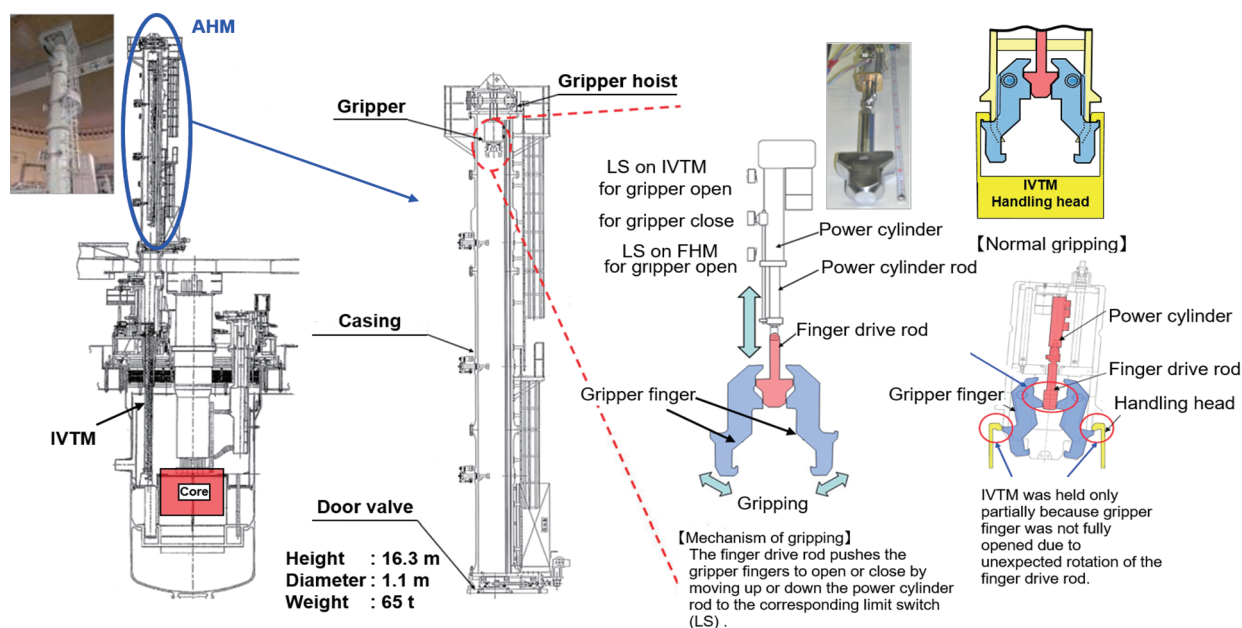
In-vessel transfer machine (IVTM) and Auxiliary handling machine (AHM)
